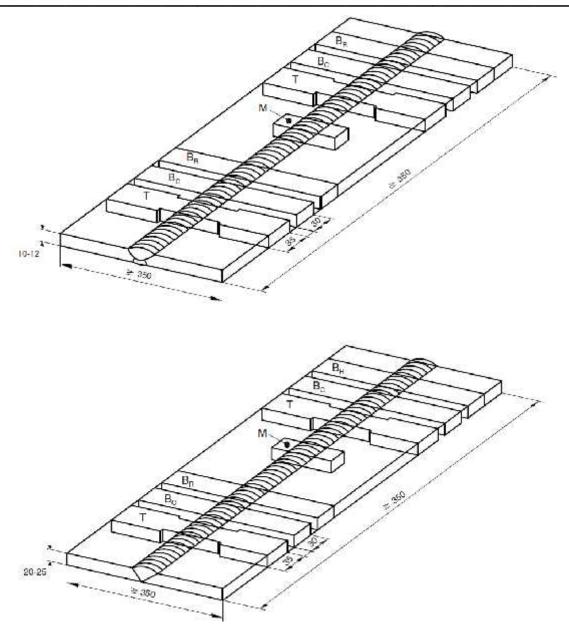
Additional butt weld test assembly in downhand position
